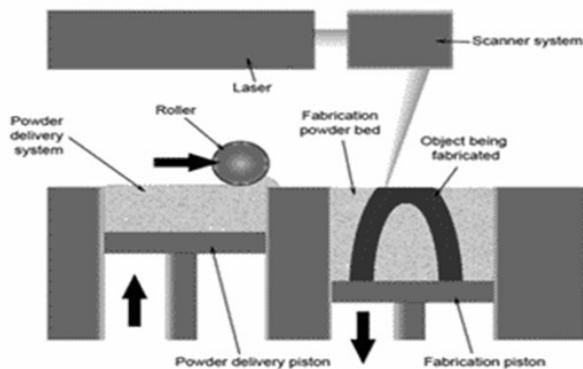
schematic view of a laser based sintering/melting machines [5]
